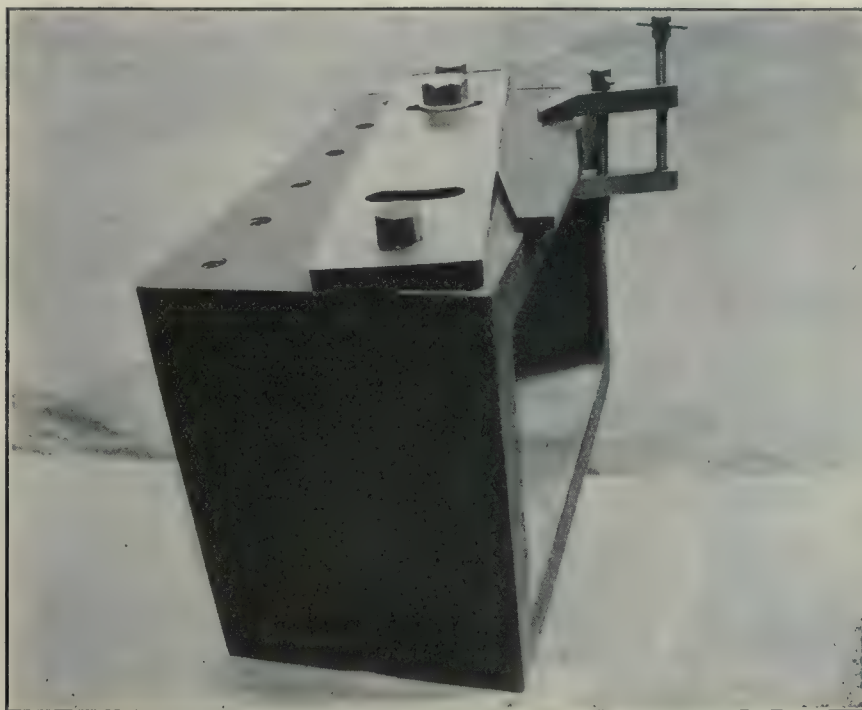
SINE BAR SET UP FOR DEVELOPING GAUGE.
